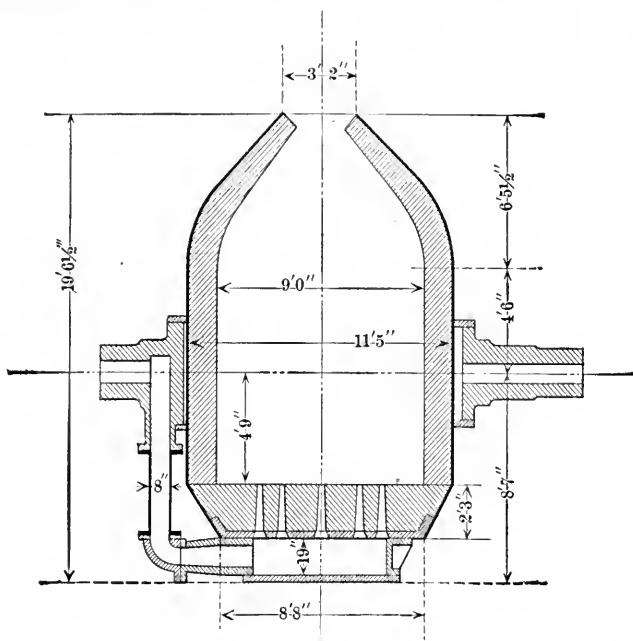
FIG. I.—SECTION OF BESSEMER CONVERTER IN UPRIGHT POSITION.
